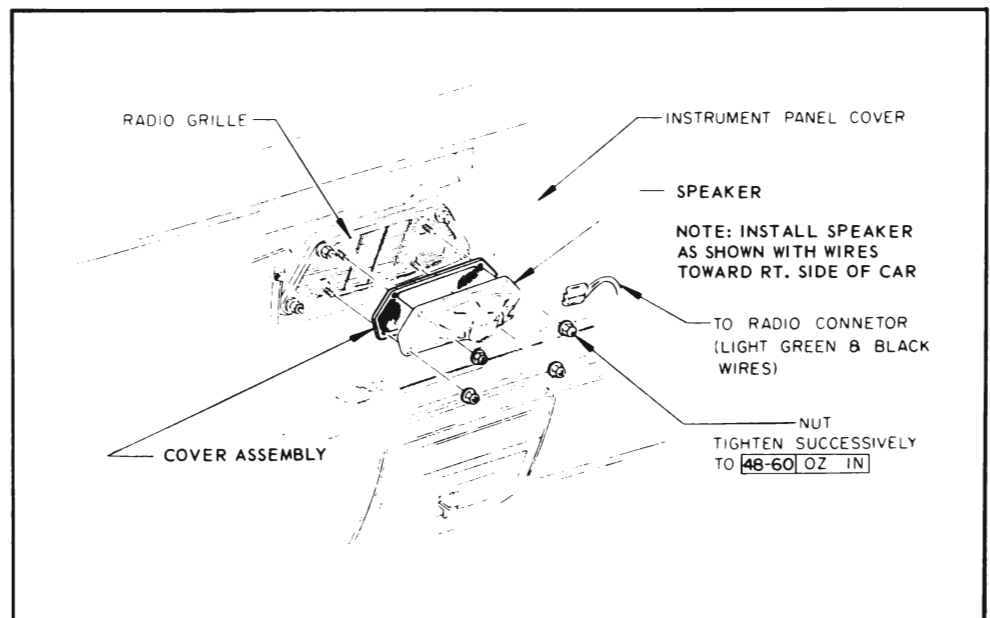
Front Radio Speaker Installation - 45000, 46000 and 49000 Series
